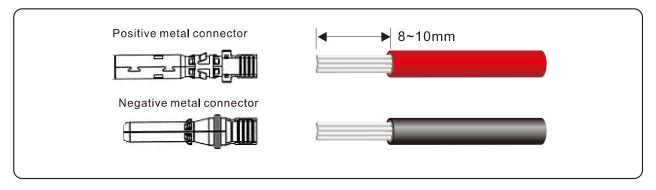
Removing insulation layer for DC cable (unit: mm)
